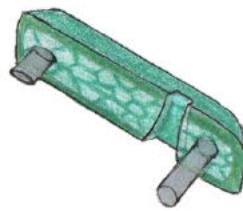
, DRAWING ISOMETRIC VIEW HANDLE SIDE
